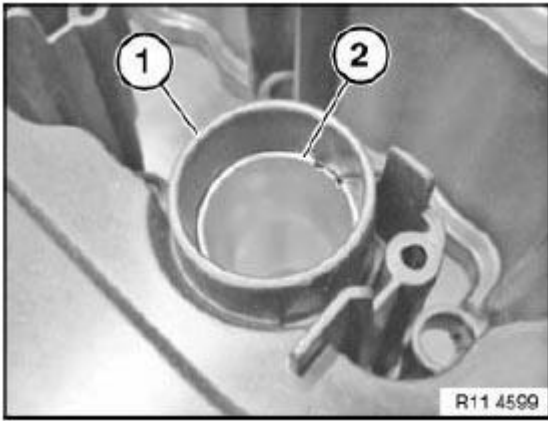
Identifying Slotted Sleeves And Cylinder Head Cover
